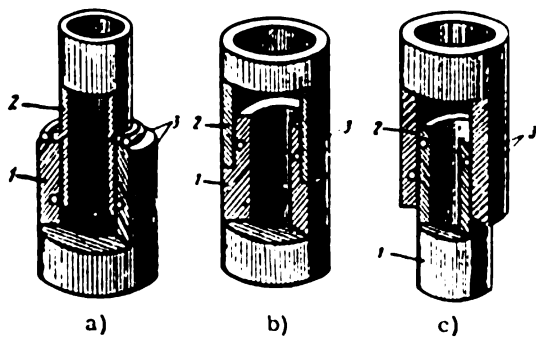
Inserting the solder 3 in the feeding grooves of the parts 1 and 2 soldered by local heating:
